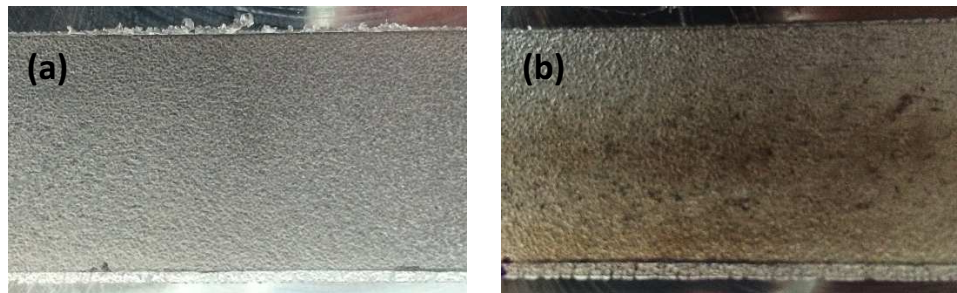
Qualitative surface difference between welding steel on different baseplates: (a) Al 6061-T6, 9.53 mm (0.375 in) thick; (b) Annealed 4130 St, 3.18 mm (0.125 in.) thick. The steel baseplate weld develops a brown surface finish due to enhanced slipping from improved bonding.
